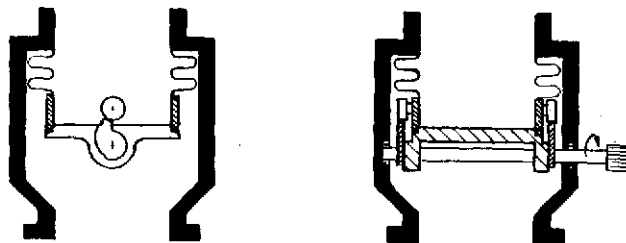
Visor Valve - Retractable Sealed Sequenced Seal
